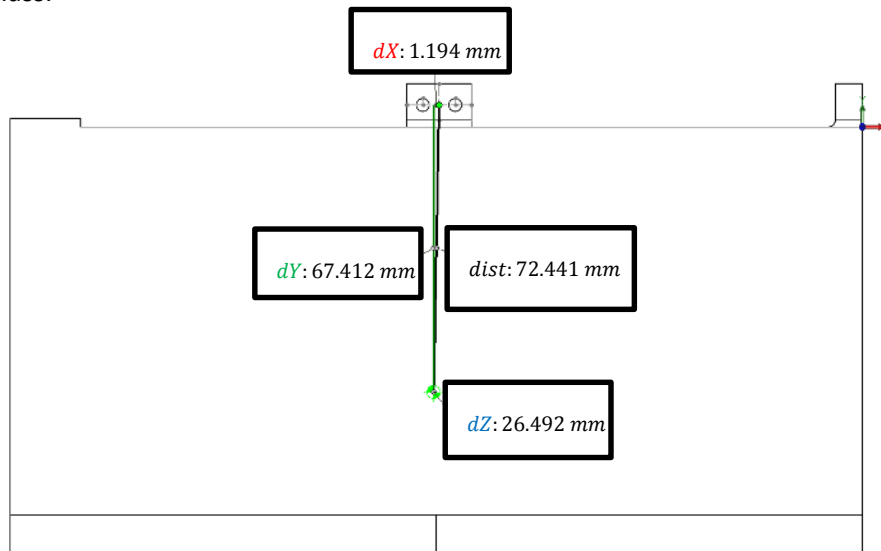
Tab Analysis, Overhead View of Assembly with Distance
